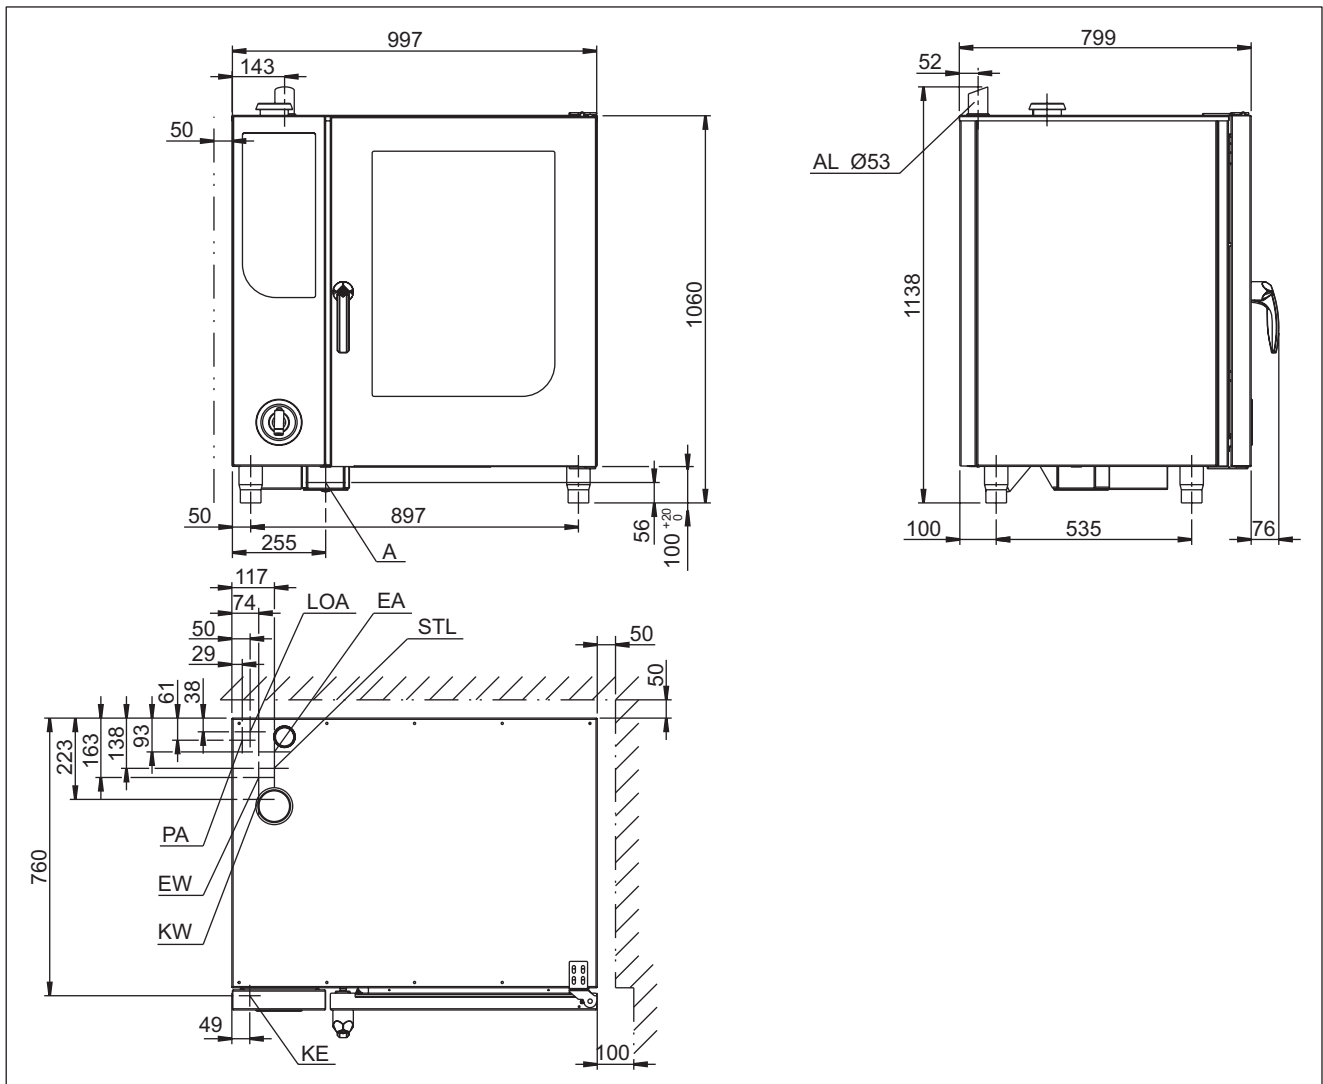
Combi Steamer 115/120, unit dimensions in mm
